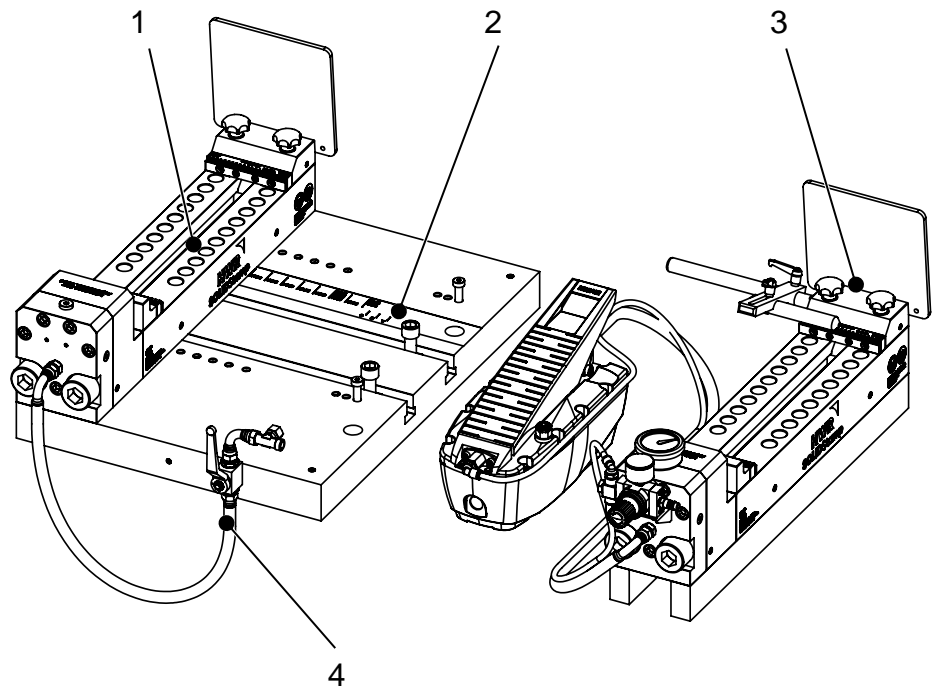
Setup of SOLIDStamp double stamping unit
